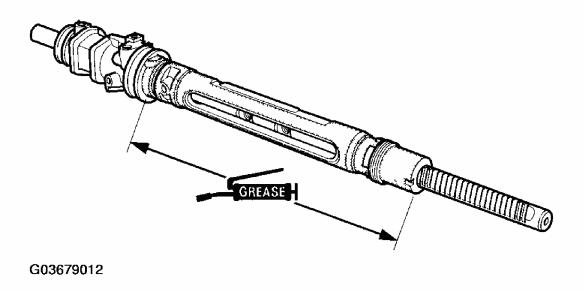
Coating Housing Surface With Multipurpose Grease Courtesy of AMERICAN HONDA MOTOR CO., INC.
